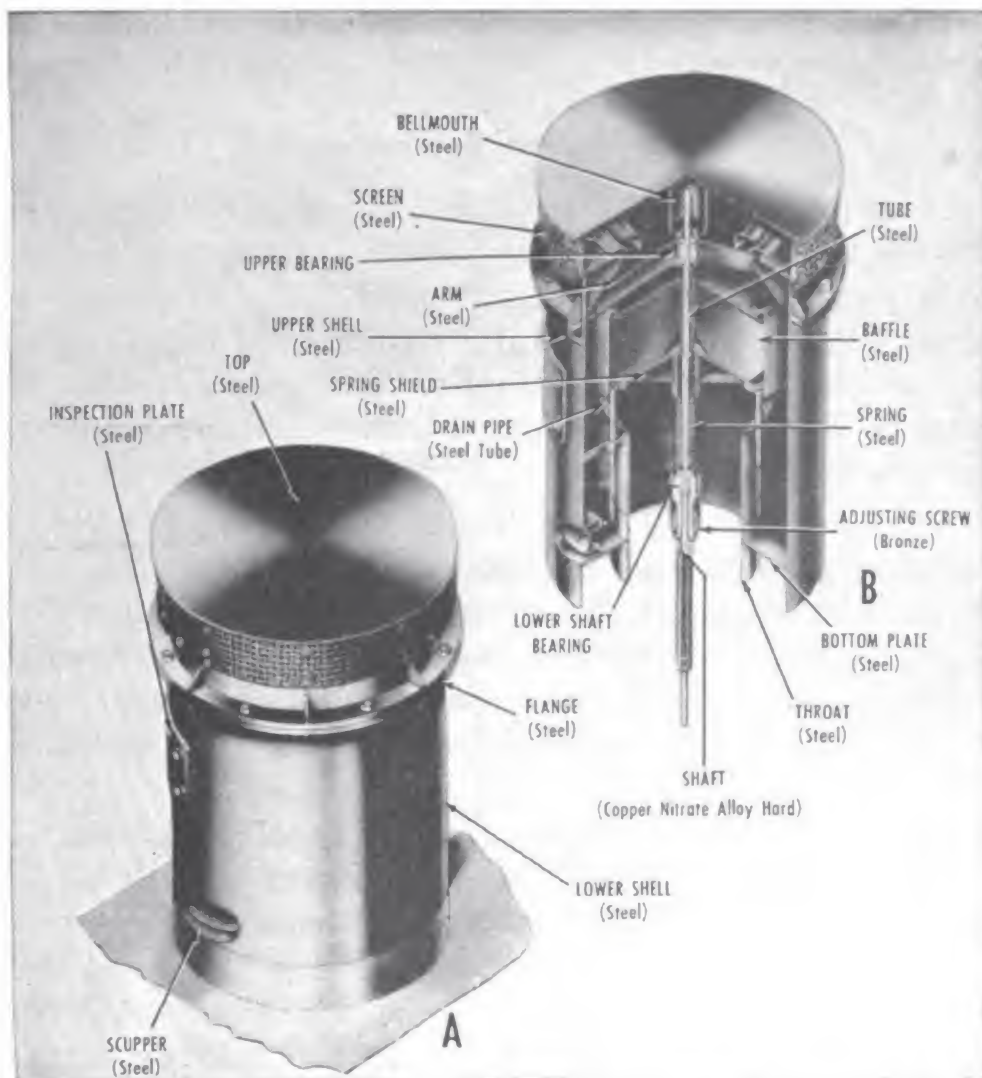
Waterproof ventilator: (A) exterior view, (B) cutaway view.
